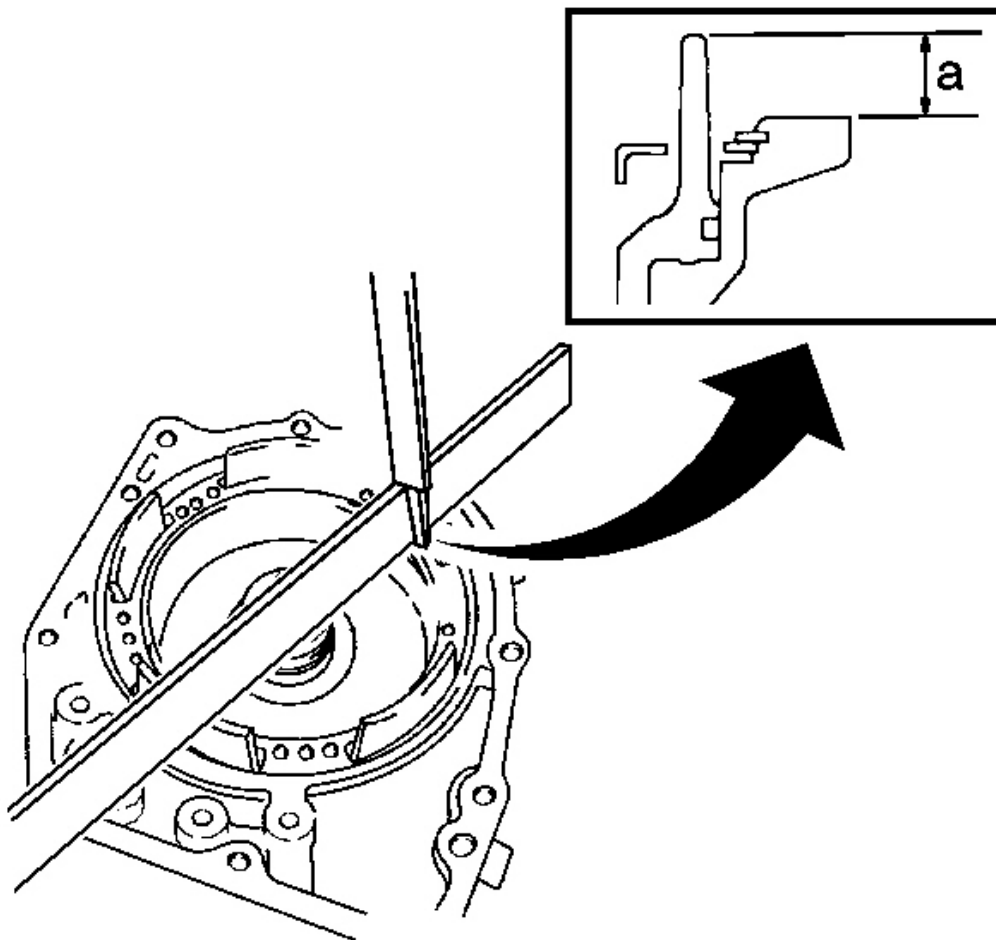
Measuring The Distance Between Transaxle Rear Cover & Straight Edge Using Vernier Calipers
